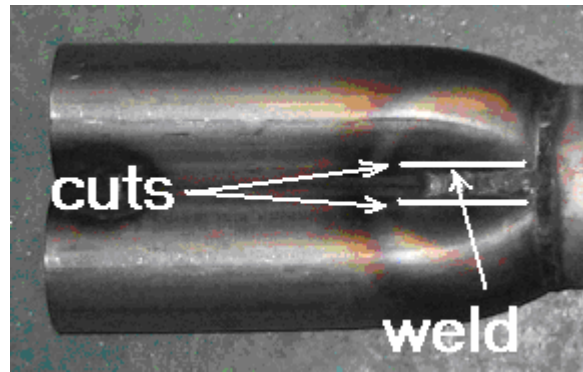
Free-flow joiner created by cutting and welding 180° mandrel bend
